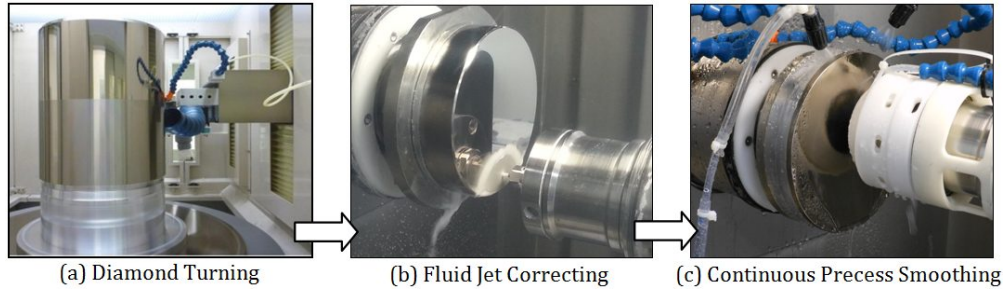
Process chain to fabricate X-ray molding die from electroless nickel plate aluminum drums [8].
